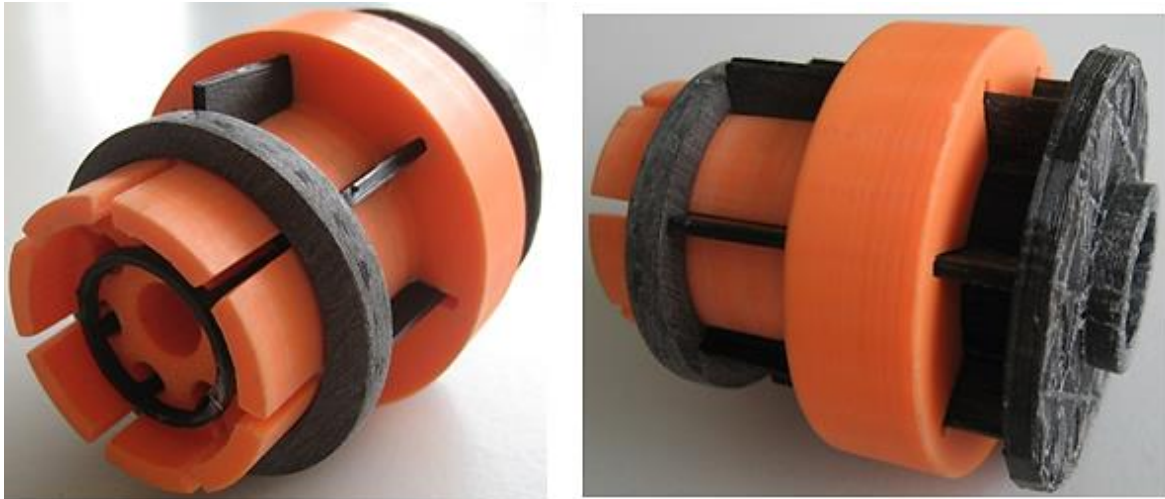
Rotor Set (rotor, vanes, front ring sealer, rotor sealer, vanes holder)
